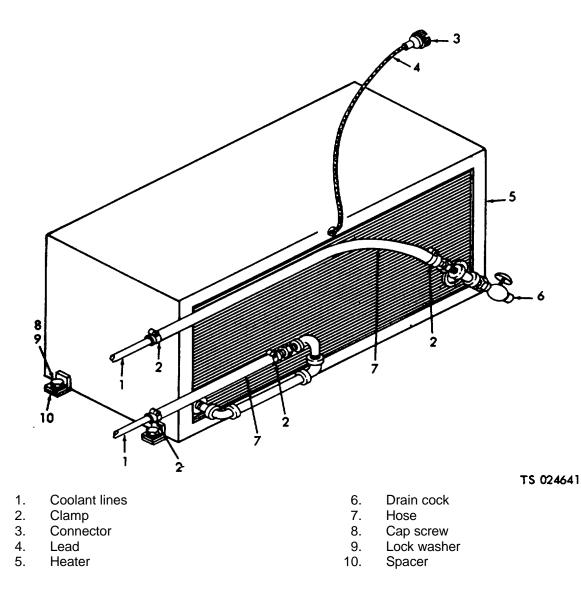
Heater removal points (ser. nos. L-1 666-T through L1668-T).
